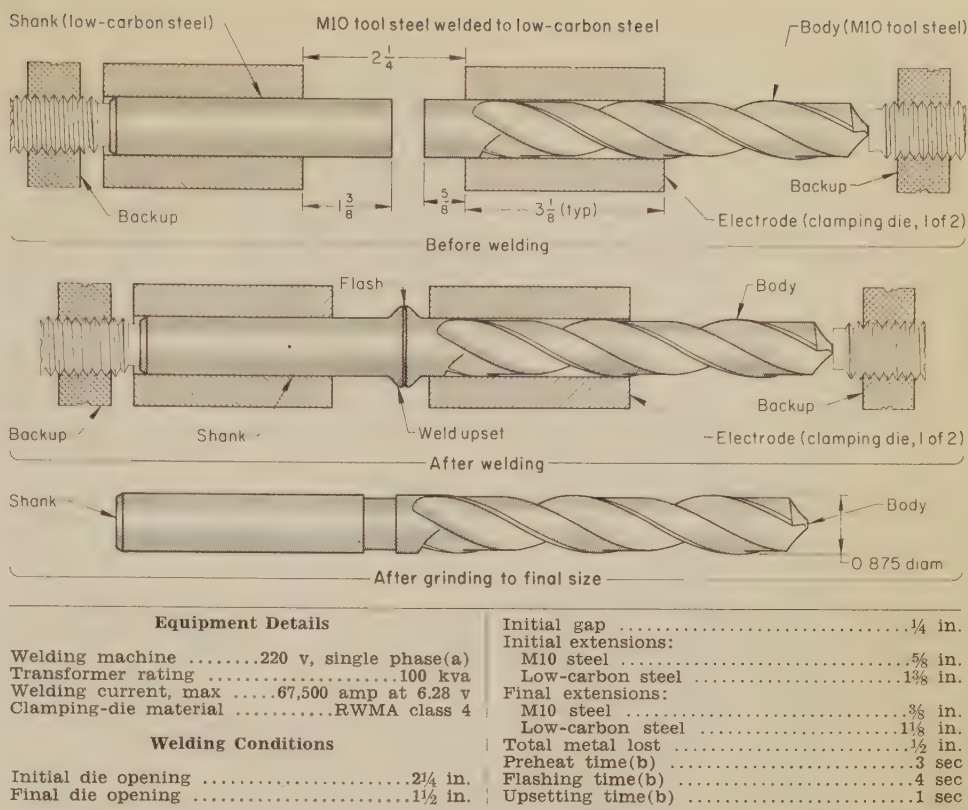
High speed tool steel drill body and low-carbon steel shank that were joined by flash welding, then ground for upset removal and final sizing (Example 430)
